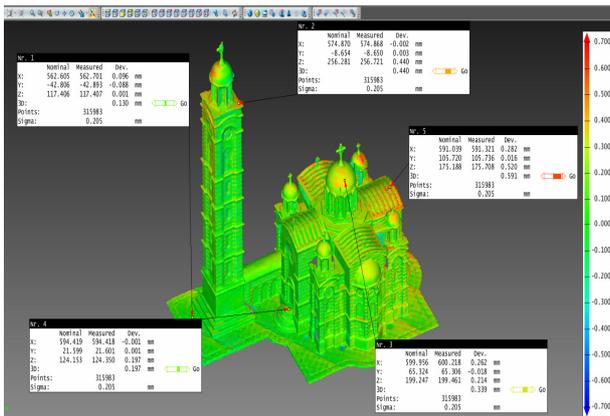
Comparison between the geometry of the CAD model and the prototype built on Dimension Elite 3D printer (Focus 3.1)
